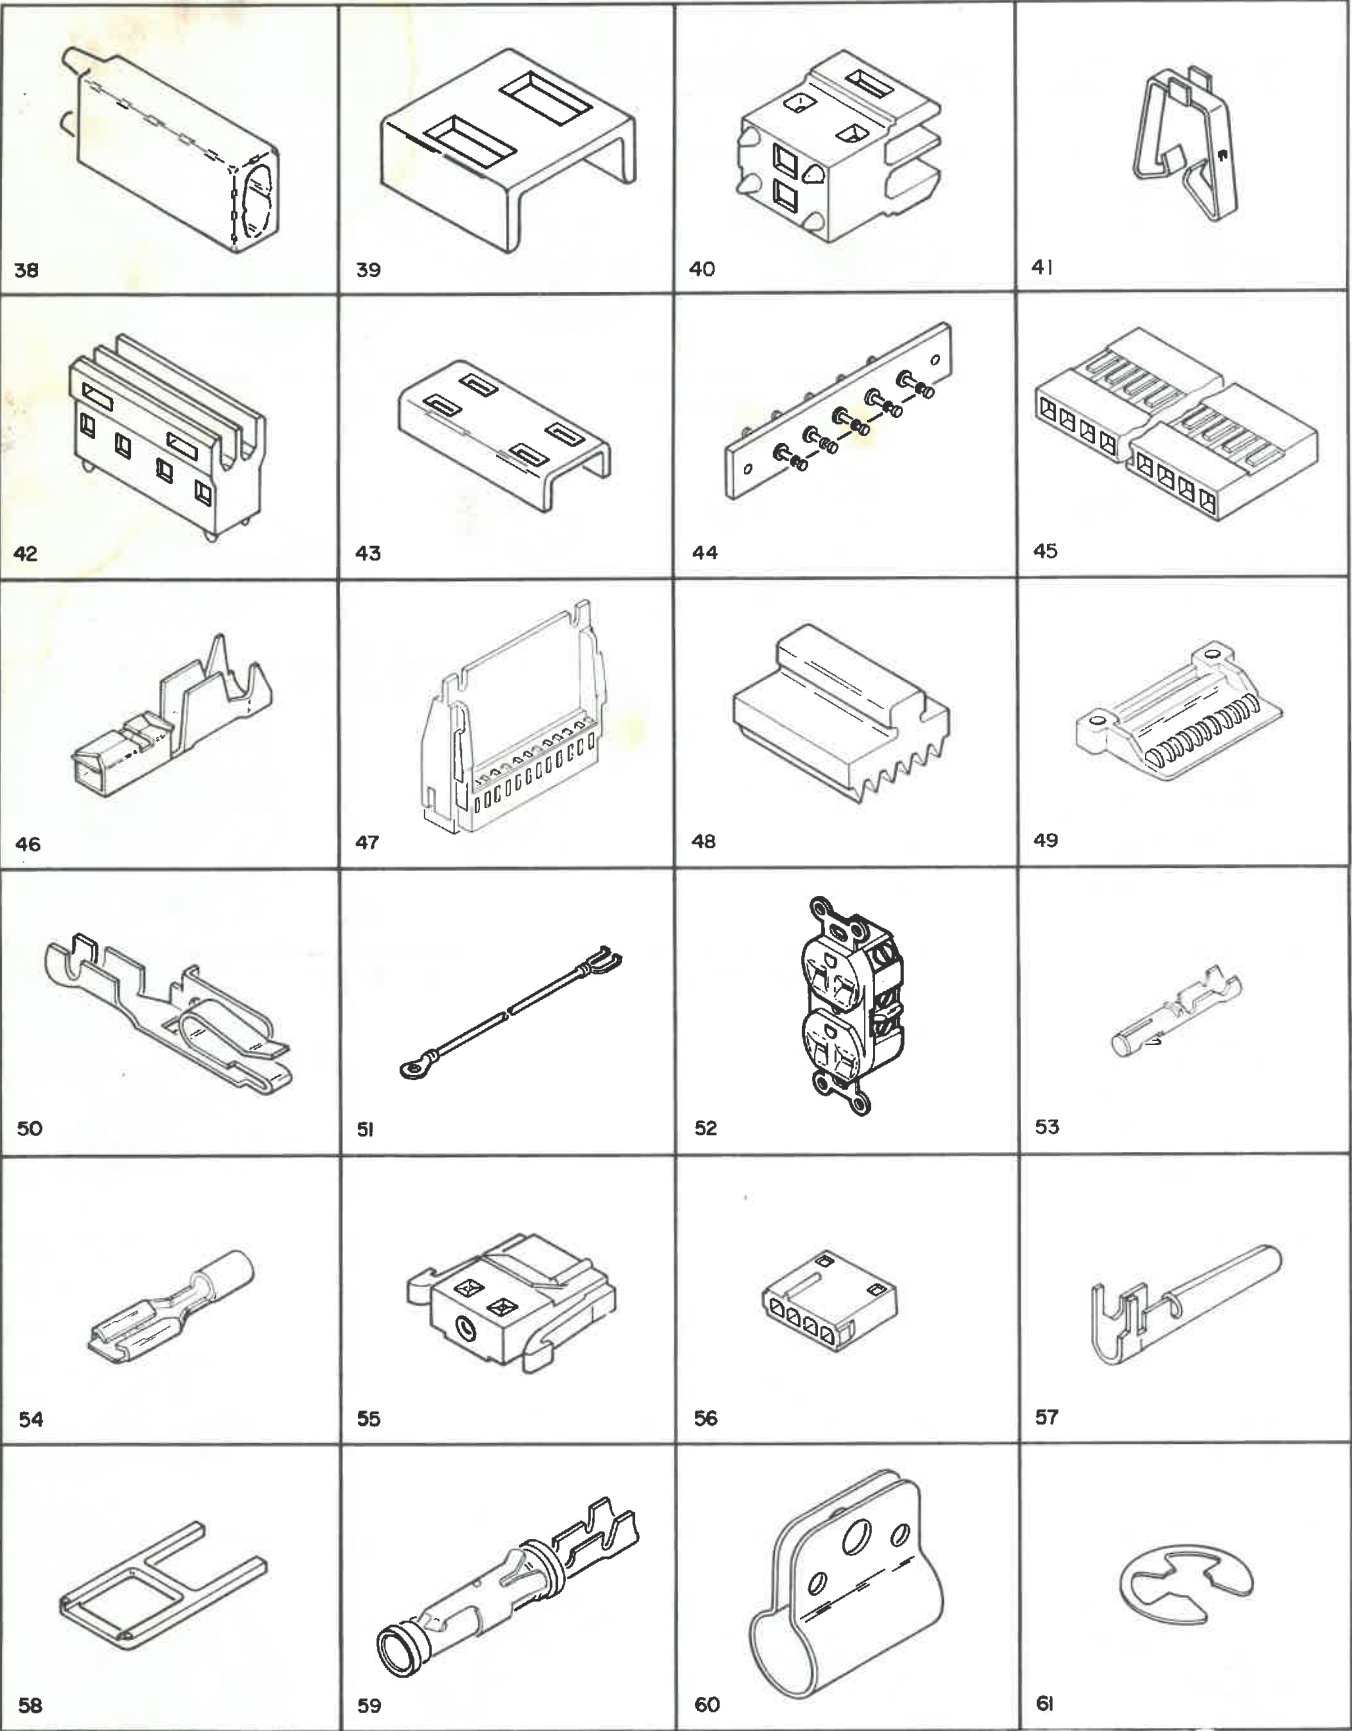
CABLE AND JUMPER ASSEMBLY COMPONENT PARTS. SHEET 2 OF 3. INDEX NOS. 38-61. SEE LIST 12.
